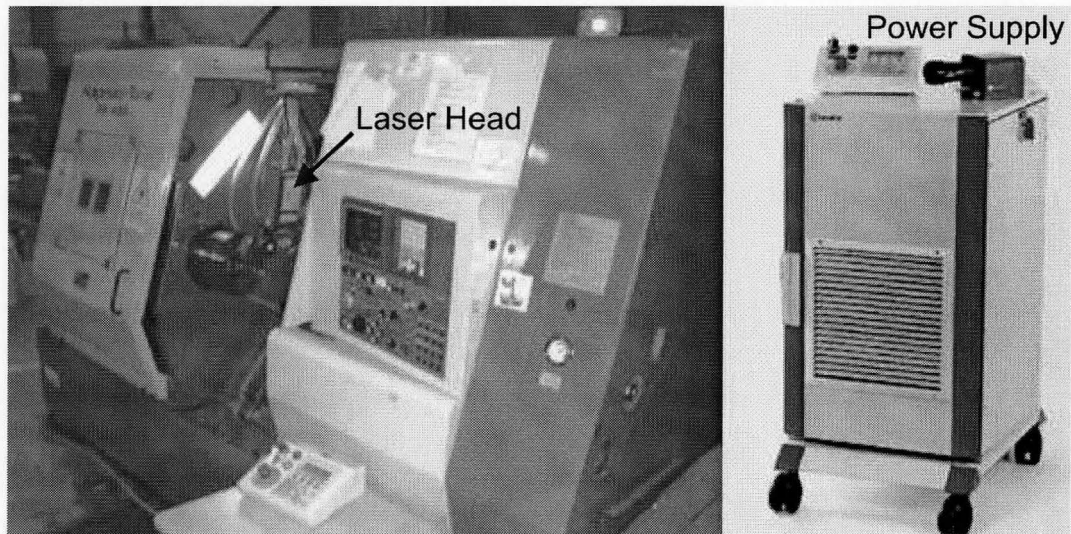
Laser in Machine Tool and Laser Power Supply.
